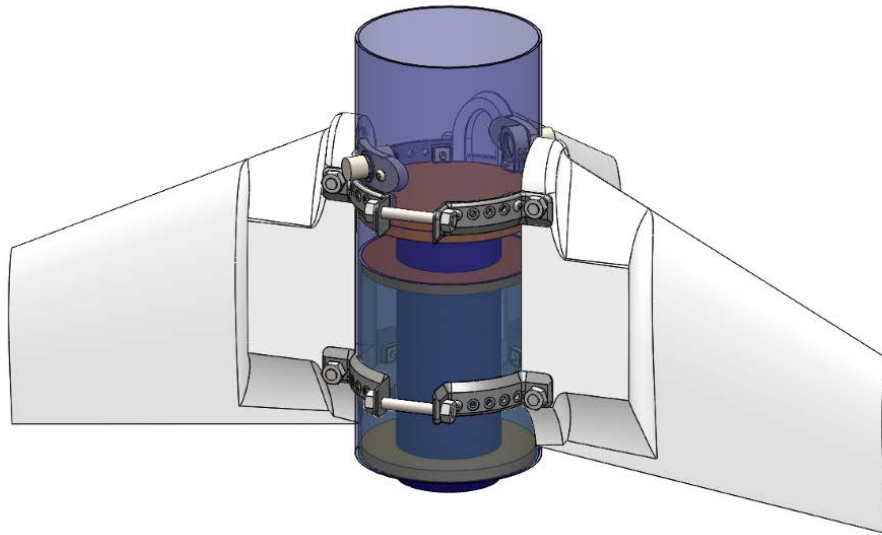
Model of the assembled motor section, including the passive variant of the active control fins designed by the FDC team. One fin has been removed for viewing purposes.
